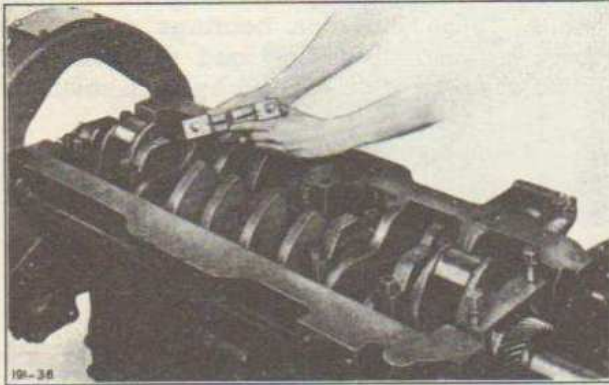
Installing Center Main Bearing Cap—Checking with Shim Stock
